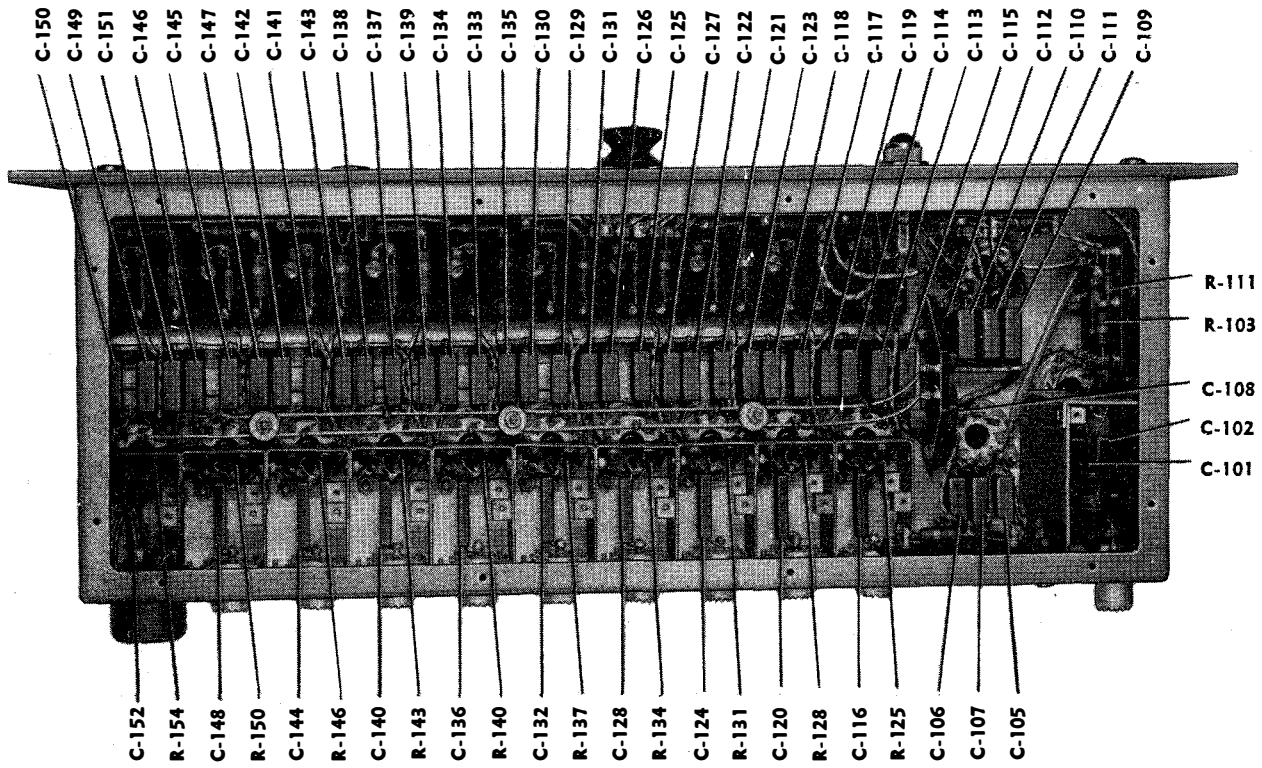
Antenna Multicoupler Unit, Bottom View of Chassis
